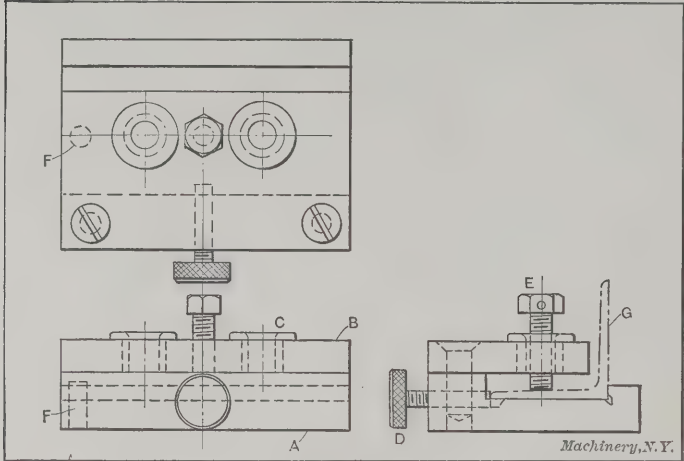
Simple Jig for Drilling Accurately-spaced Holes in Angle-iron
